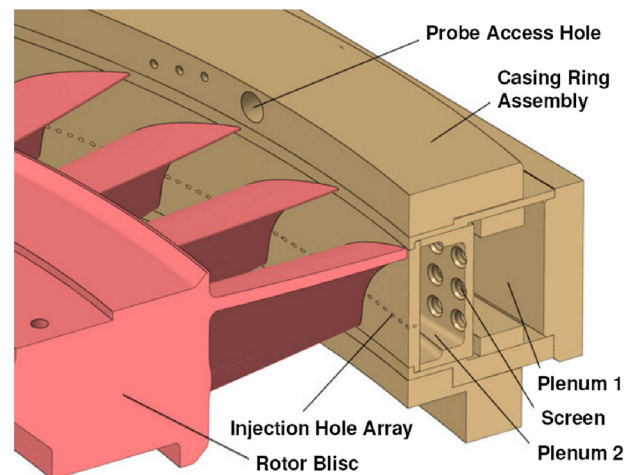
Air-injection system and probe access within traversable rotor-casing ring assembly.
